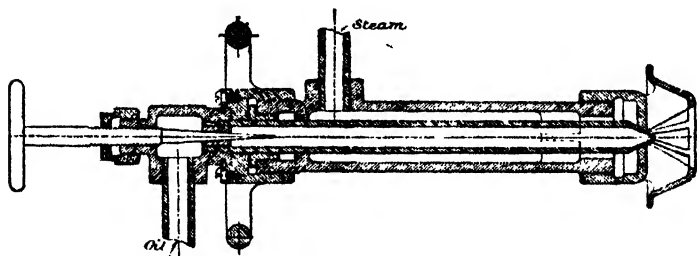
Oil City Boiler Works' steam-jet burner.
